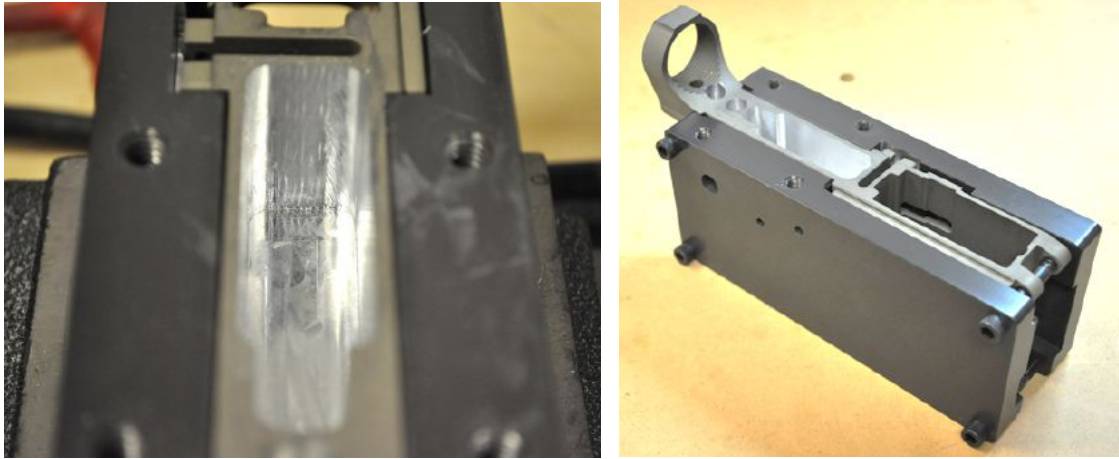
Finished trigger pocket to a depth of 1.249"
